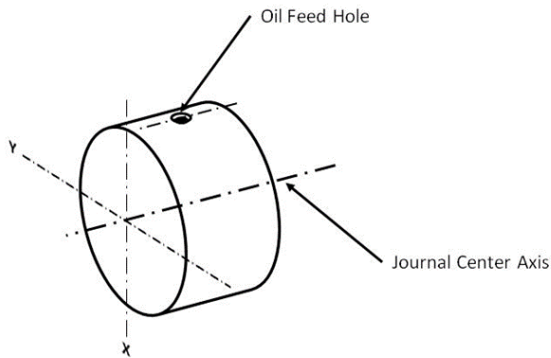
X and Y-Axis of Camshaft Journal
